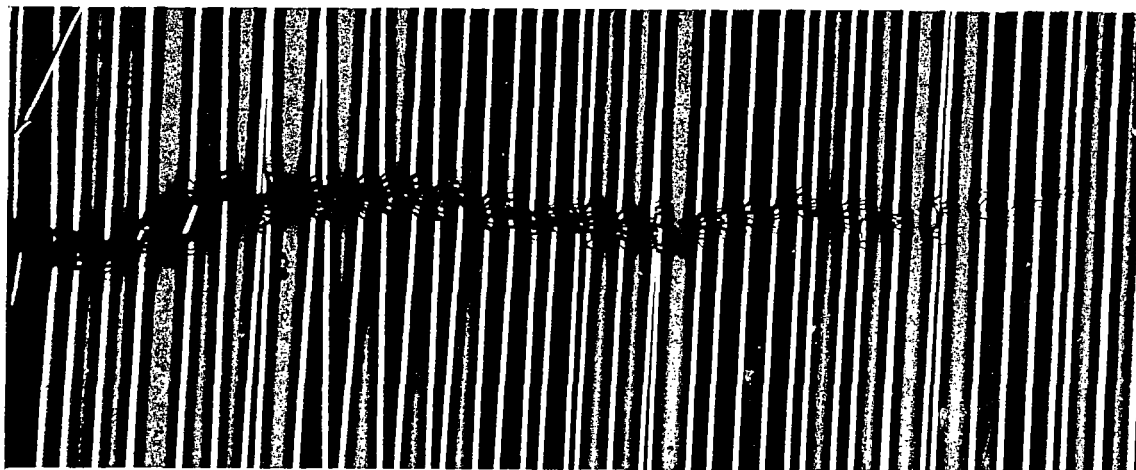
General view of matching transverse fracture surfaces of monolayer B-Al composite showing filament fragmentation. Filament diameter, 0.14 mm (0.0056 in.).
